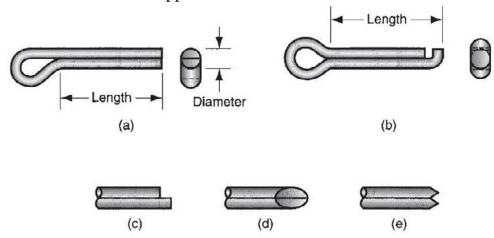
Cotter pins: (a) offset head, standard point; (b) symmetric head, hammerlock point; (c) square point; (d) metered point; and (e) chisel point.
